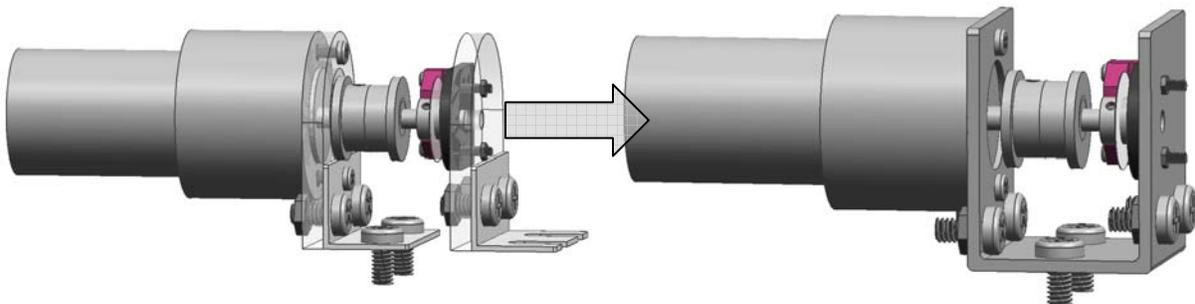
Solid aluminum motor/encoder mount reduces errors in shaft alignment.
